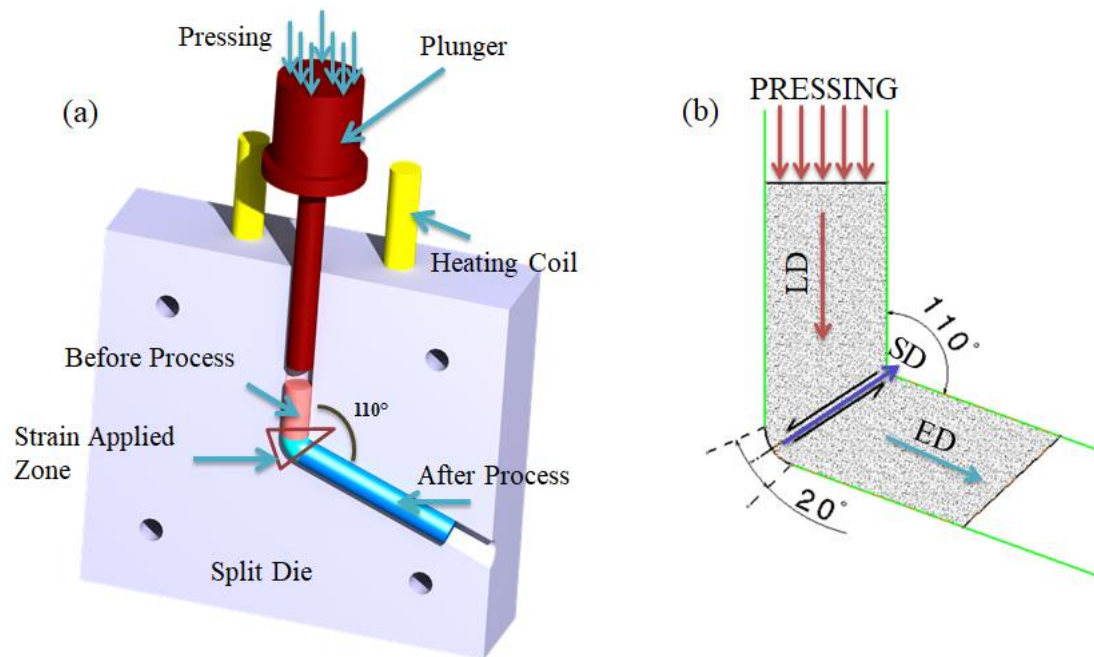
(a) Sectional view ECAP split die with heating coils and plunger, (b) Material flow mechanism during ECAP
